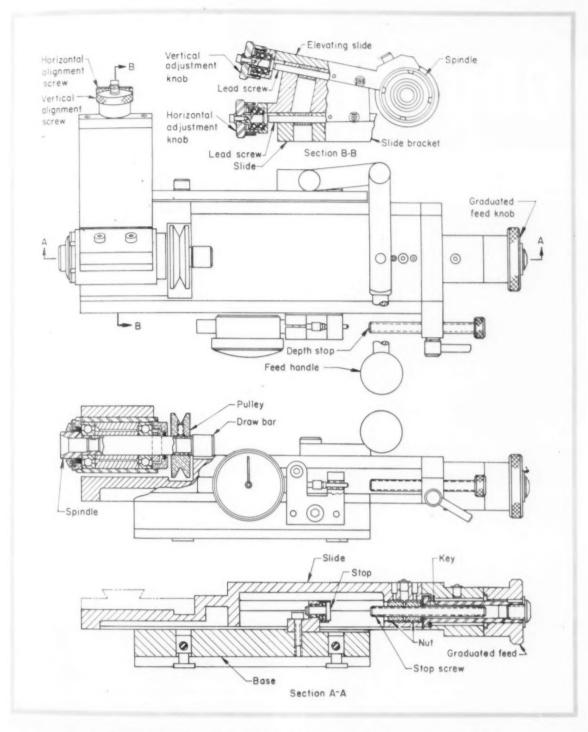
Drawing showing spindle, stops and adjustments for a micodrilling attachment.
